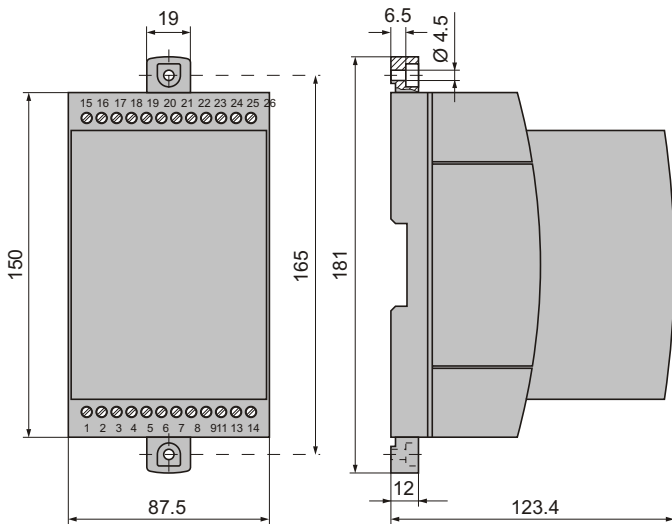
RISH *Ducer* M 00 in housing T24, screw hole mounting brackets pulled out.
